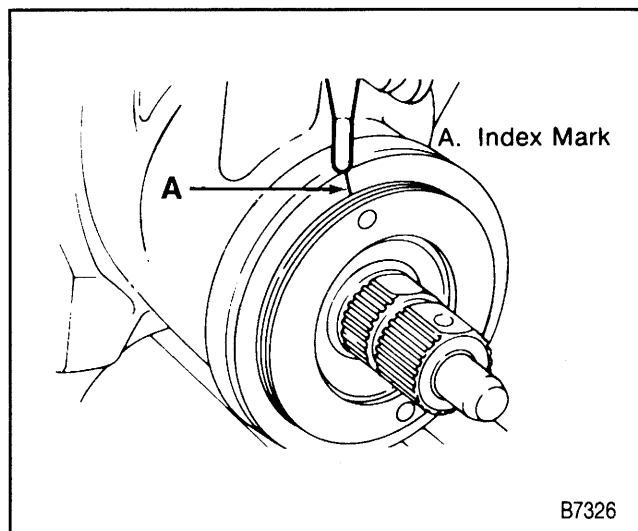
Alignment Marking the Adjuster Plug Hole with the Housing
